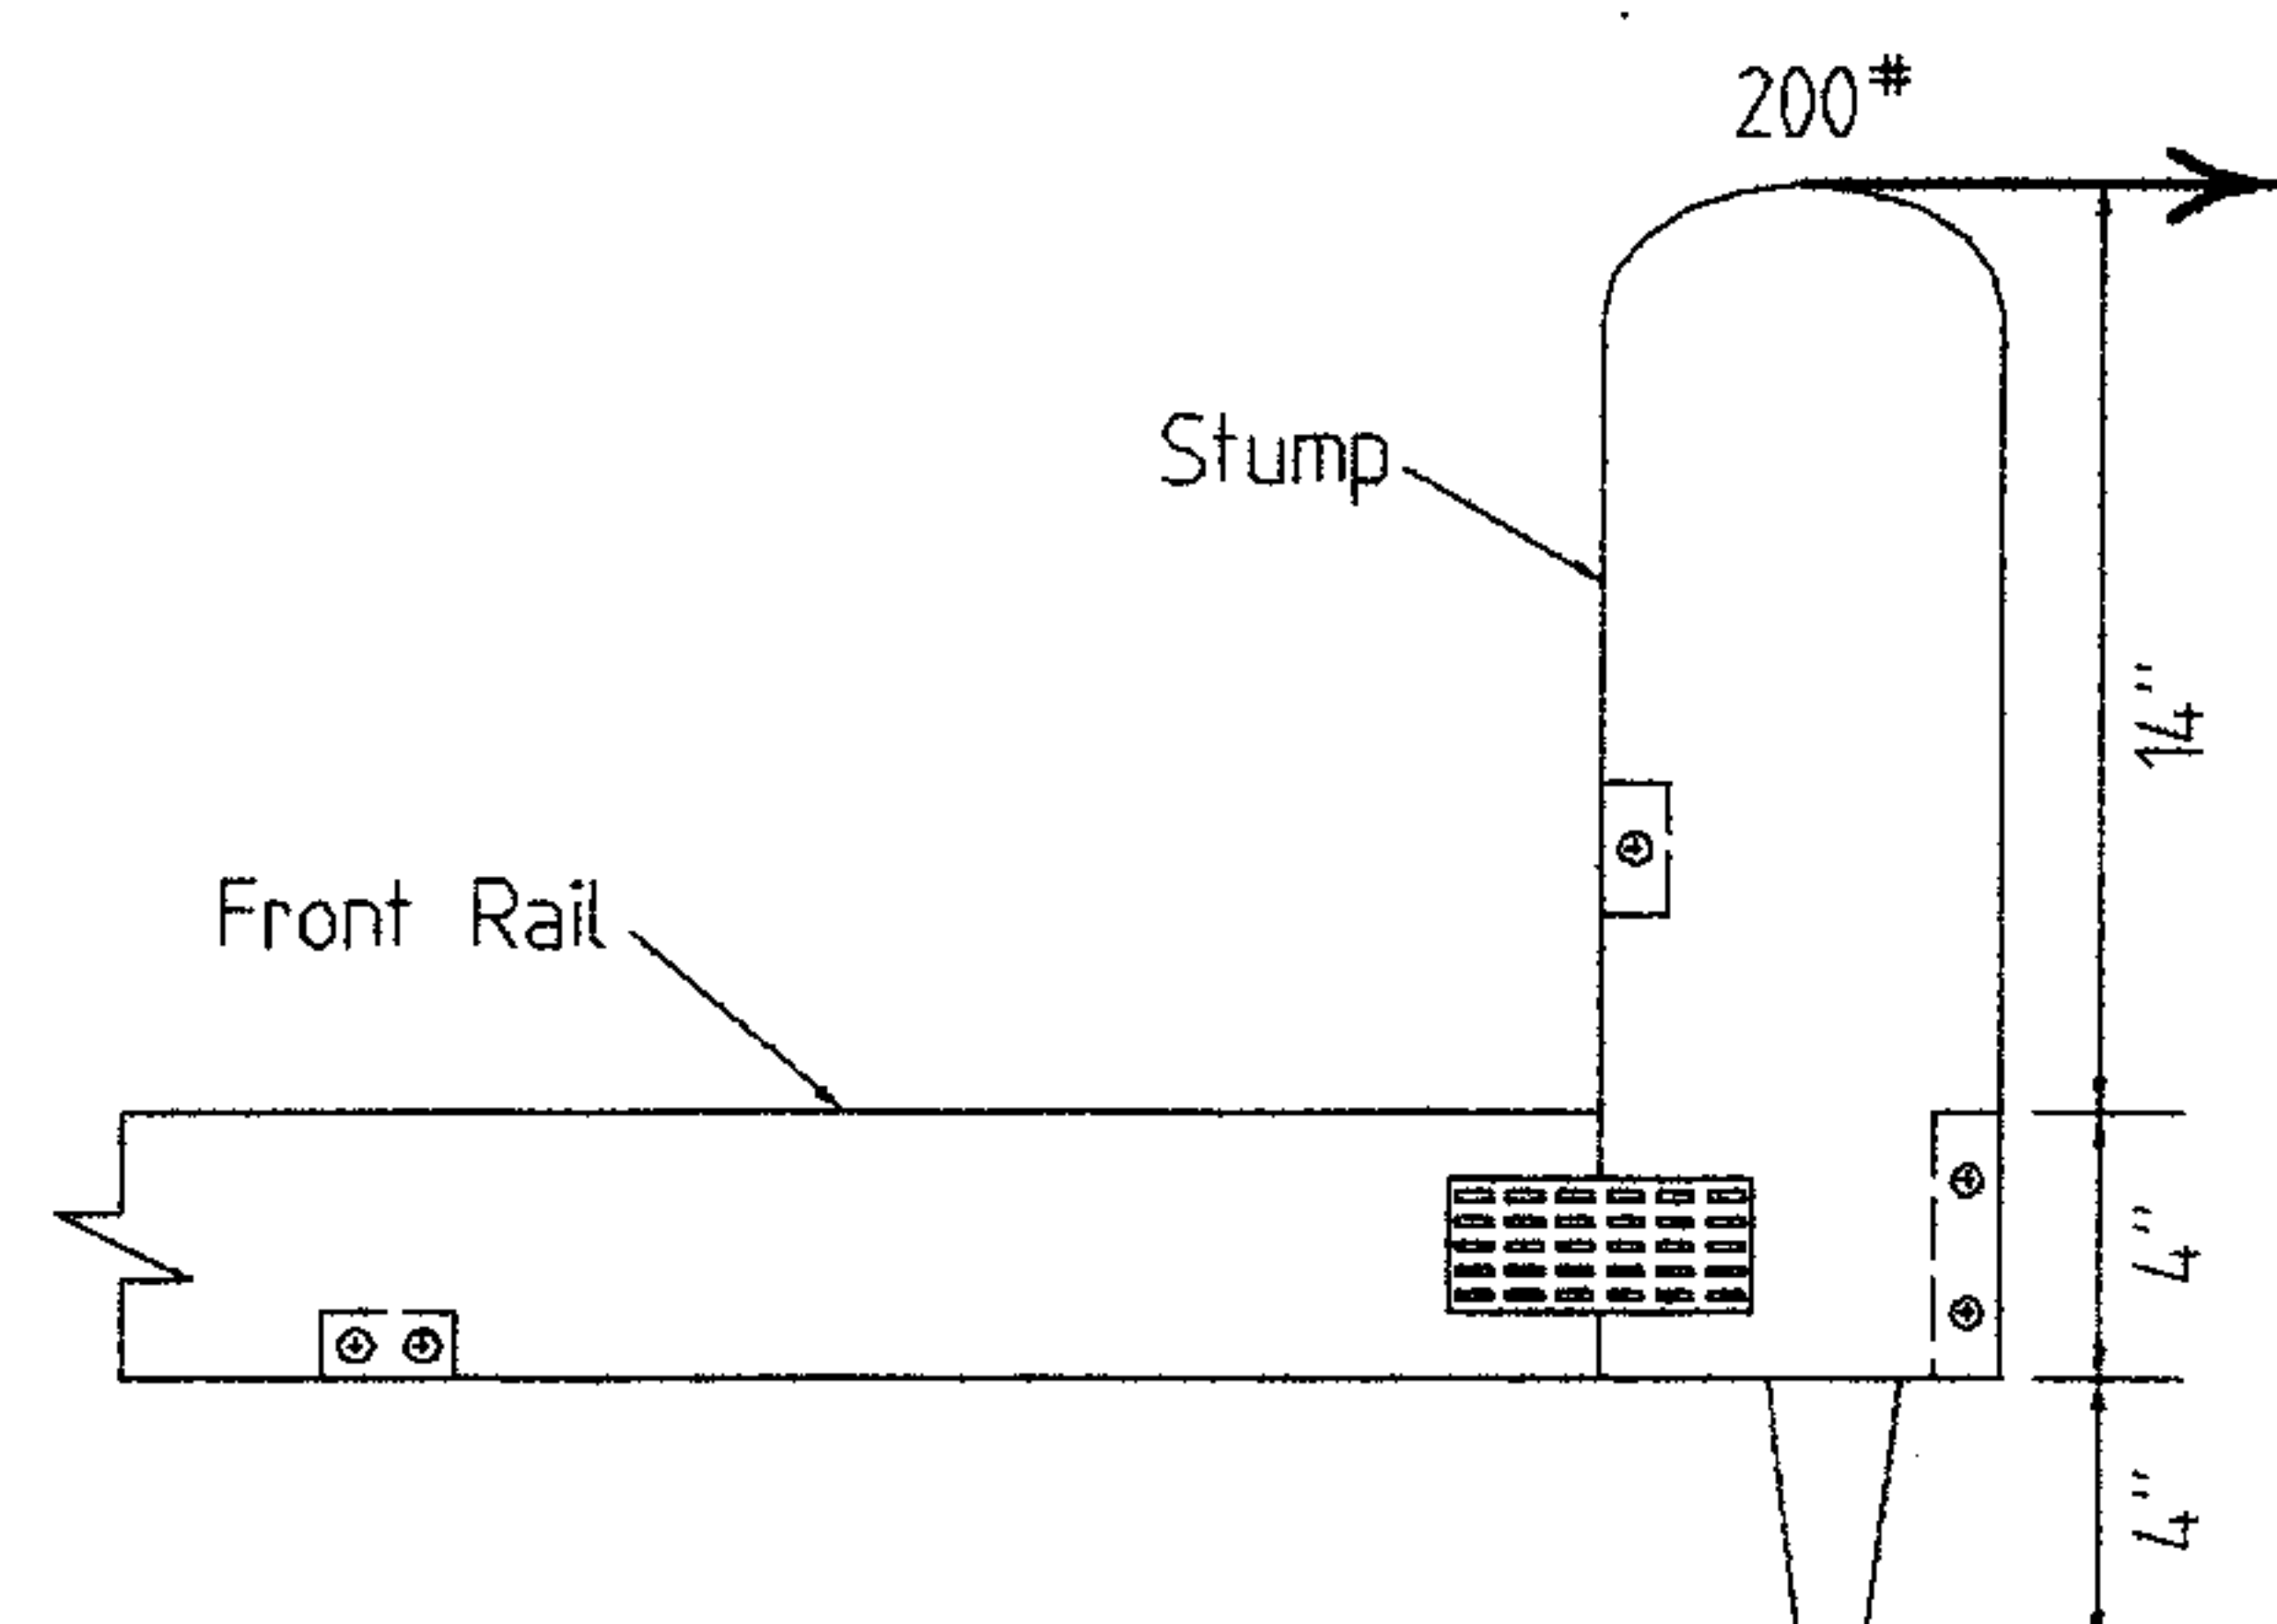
Design of front rail to stump joint using toothed metal connector plate.
